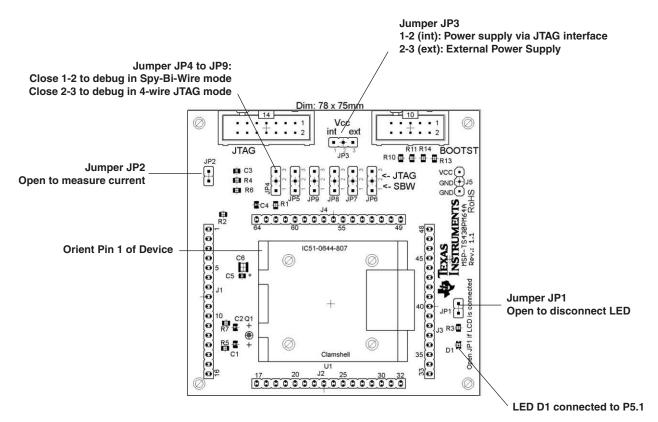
MSP-TS430PM64A Target Socket Module, PCB
